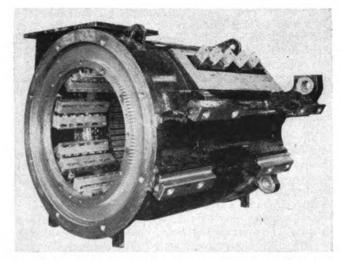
Traction motor stator, with frame head removed to show brush holders and revolving yoke
